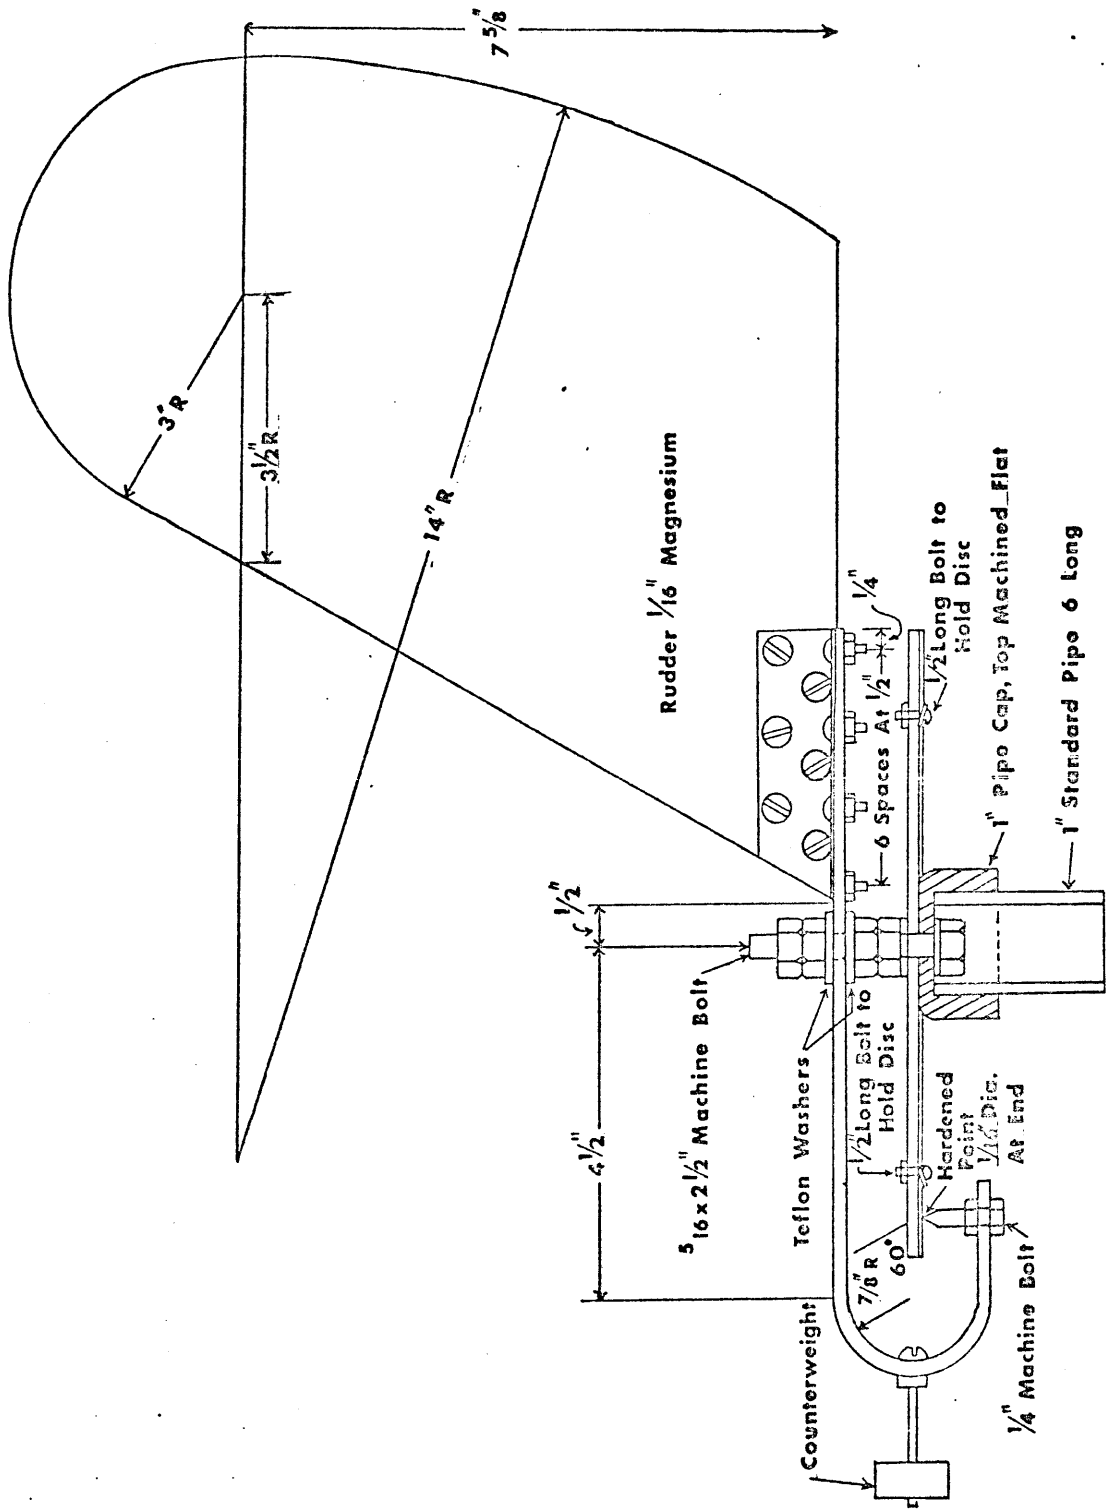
ELEVATION VIEW OF PROPOSED PREVAILING WIND INDICATOR
